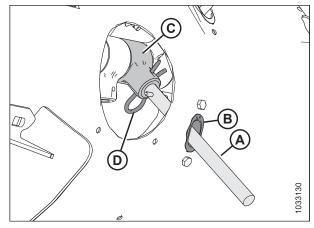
Auger Finger – Solid Finger Shown, Hollow Finger is Similar
